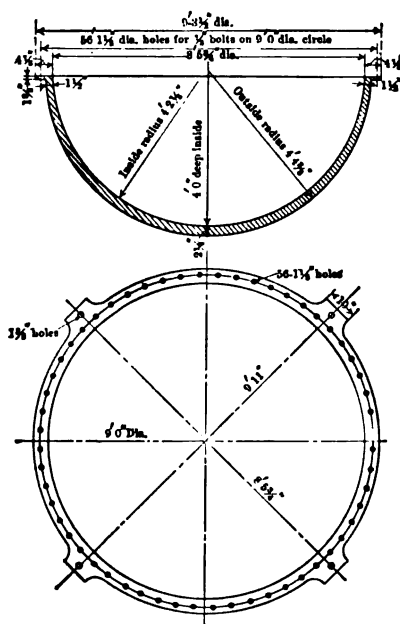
Section and flange of cast-iron still bottom (spherical).
